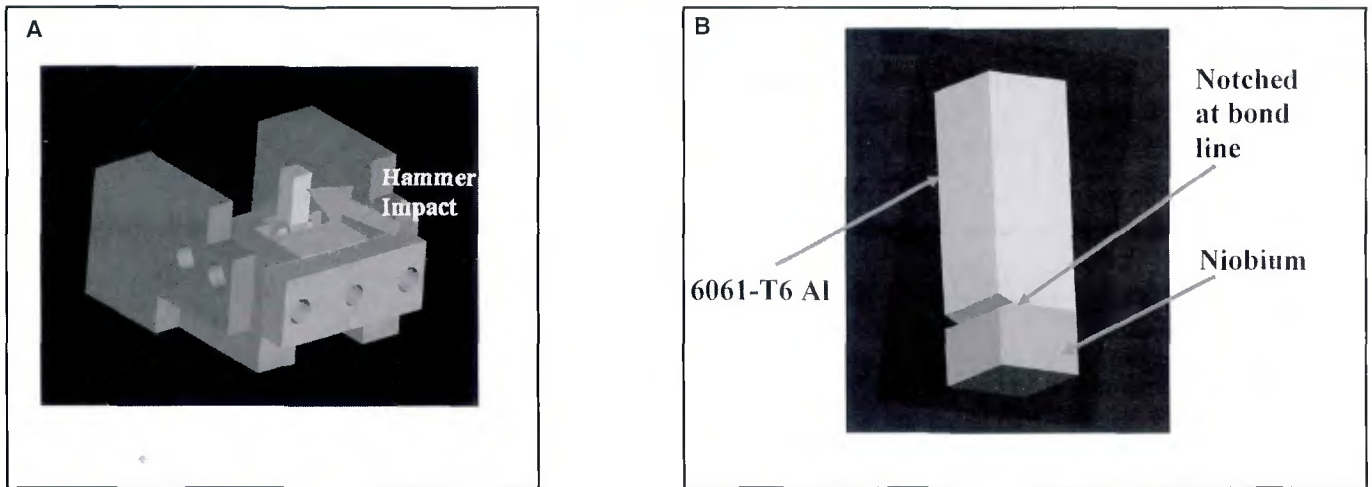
Schematic diagrams. A — The Izod impact testing setup used to measure the impact strength of the Al-Nb explosion weld; B — the modified Izod specimen.
